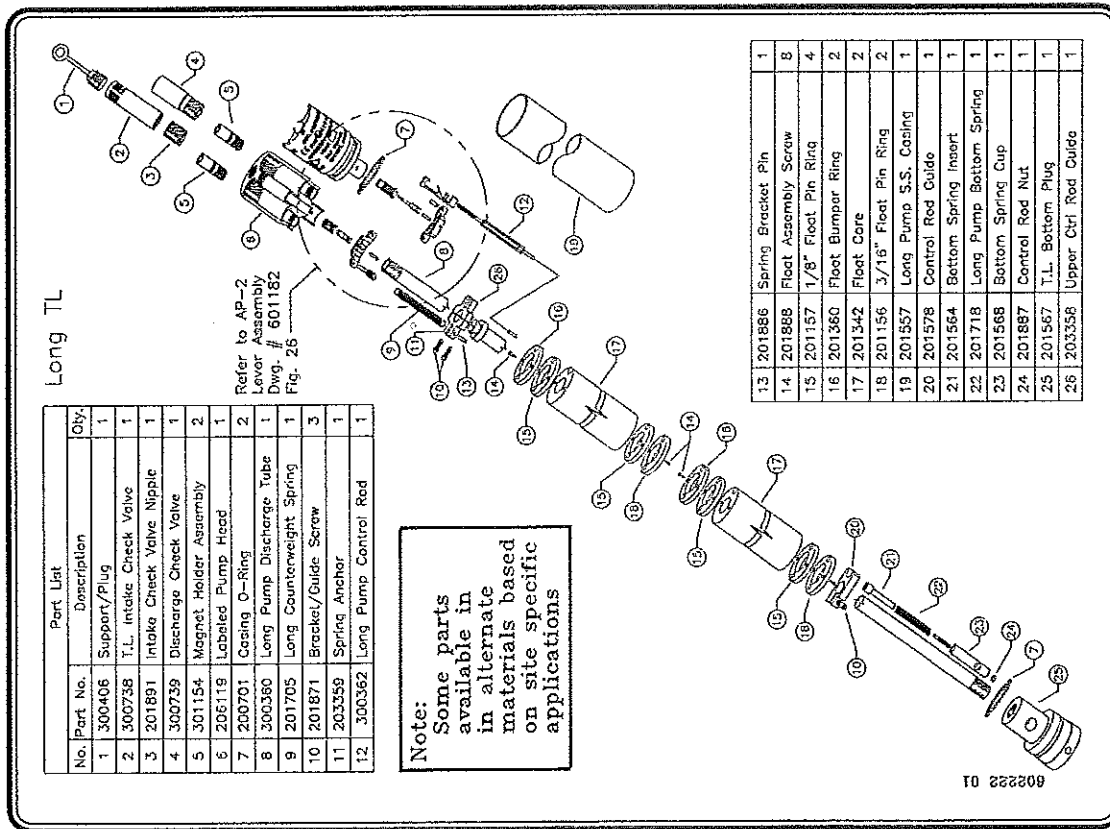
Exploded view of a Long Top-Loading AutoPump AP-2
